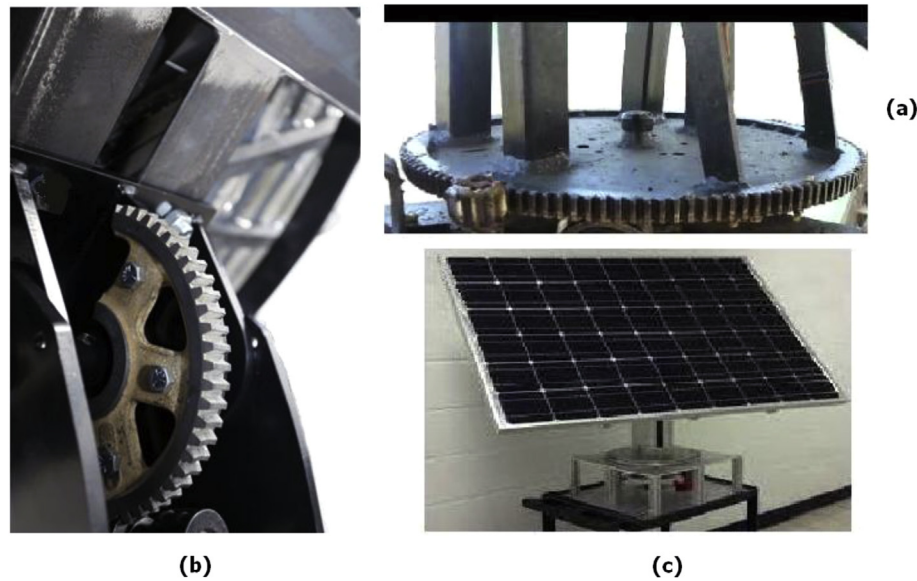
Mechanical components of the constructed solar tracker: a) Azimuth gear box b) Altitude gear box c) Assembled mechanical part together with the PV module KC200GT installed on it.
